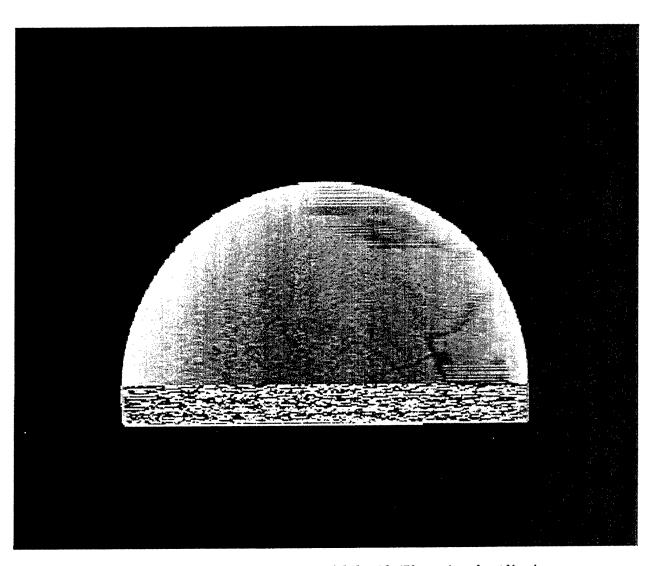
15.54 mm from bottom of disk with 65° rotation about X-axis.
